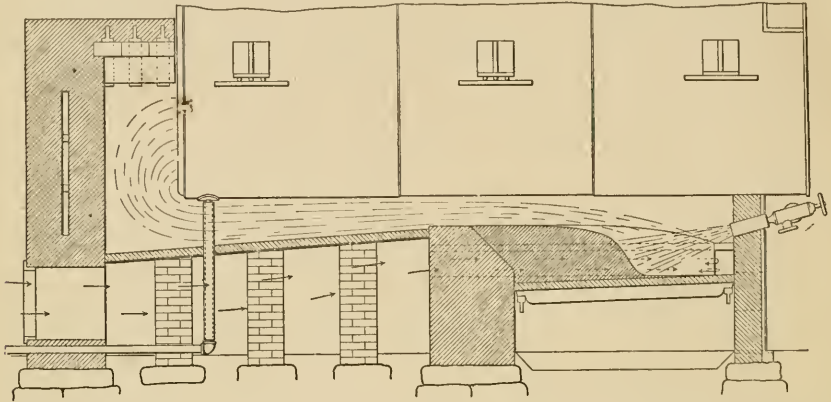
SIDE VIEW OF FURNACE ARRANGED FOR BURNING CRUDE PETROLEUM.
